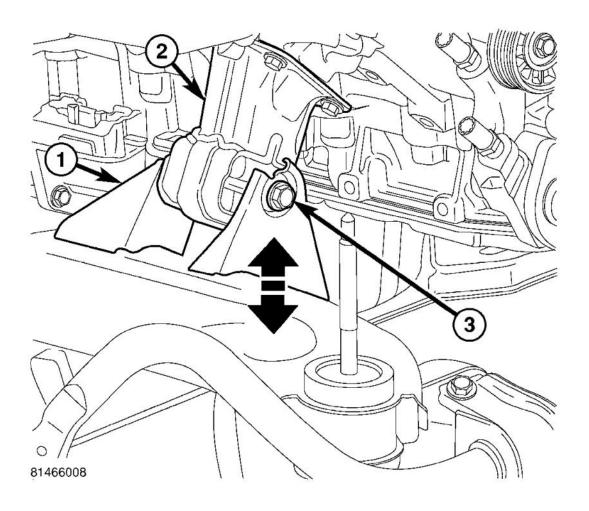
Engine Mount Bolt Courtesy of CHRYSLER LLC
